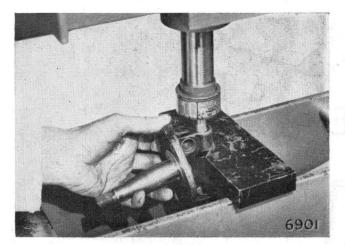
Ejecting worn swivel pin bush from lower lug of the stub axle with RG385
